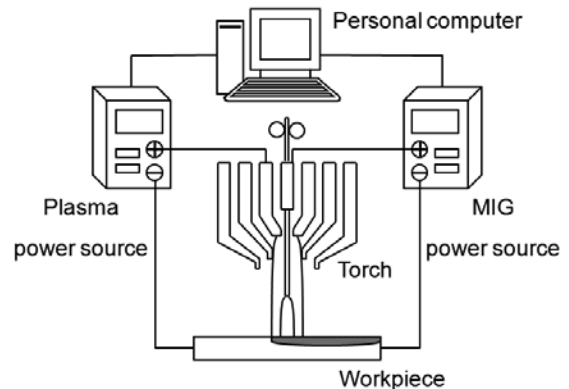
Schematic illustration of Plasma MIG welding
